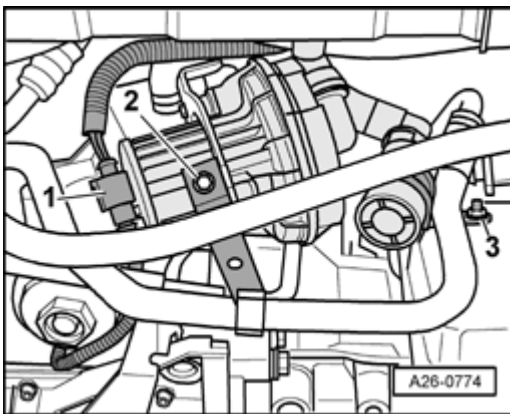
Disconnecting Electrical Connector At Secondary Air Injection (AIR) Pump Motor -V101-
